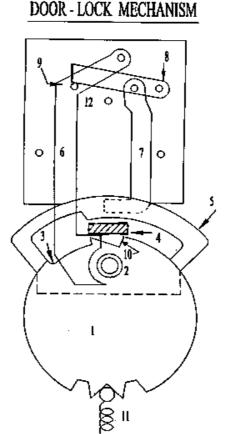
SGE INSTRUMENT DOOR LOCK ARRANGEMENT
